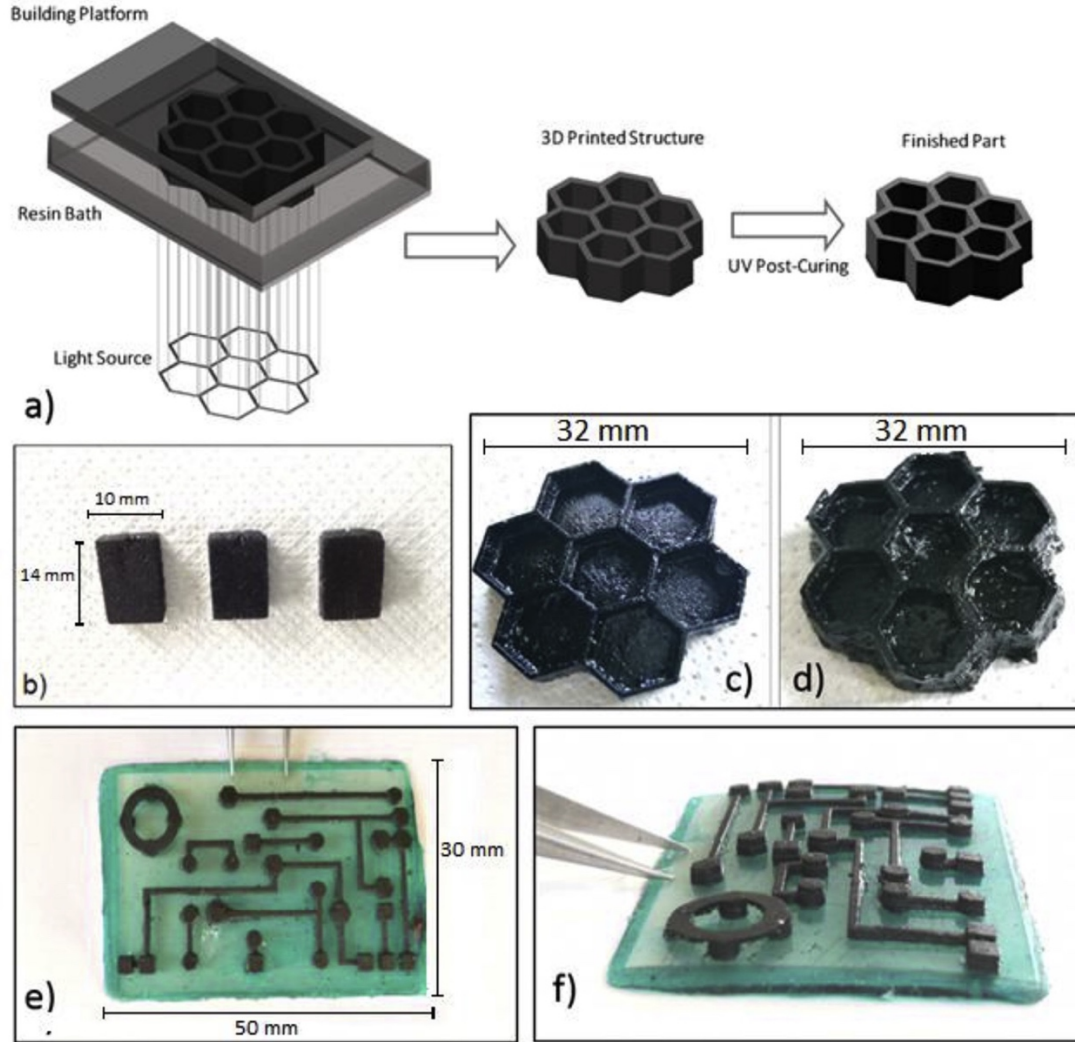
a) DLP 3D printing process for material. b) 3D printed cubes containing 0.3% wt CNTs. c) 3D hexagonal or honeycomb structure. e,f) Circuit-like structure built on an insulating base [11].
